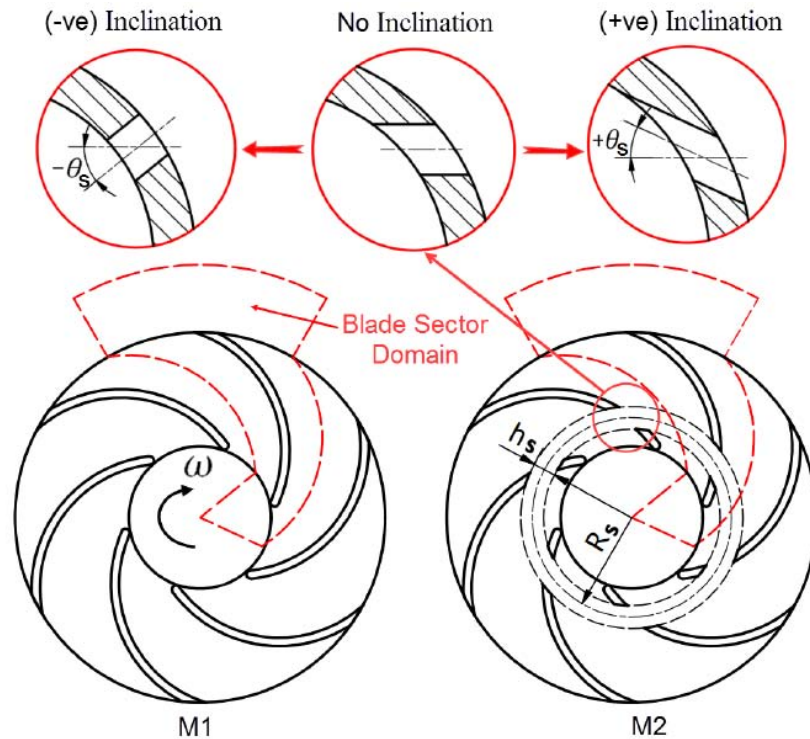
Two geometrical models: M1 impeller blade sector without slot, M2 impeller blade sector with slot.
